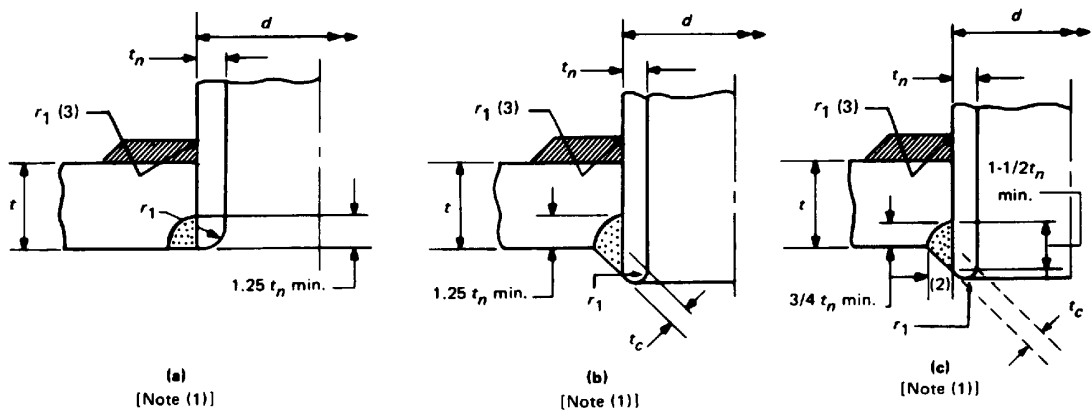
(d)-1 ACCEPTABLE TYPES OF WELDED NOZZLES USING PARTIAL PENETRATION WELDS
